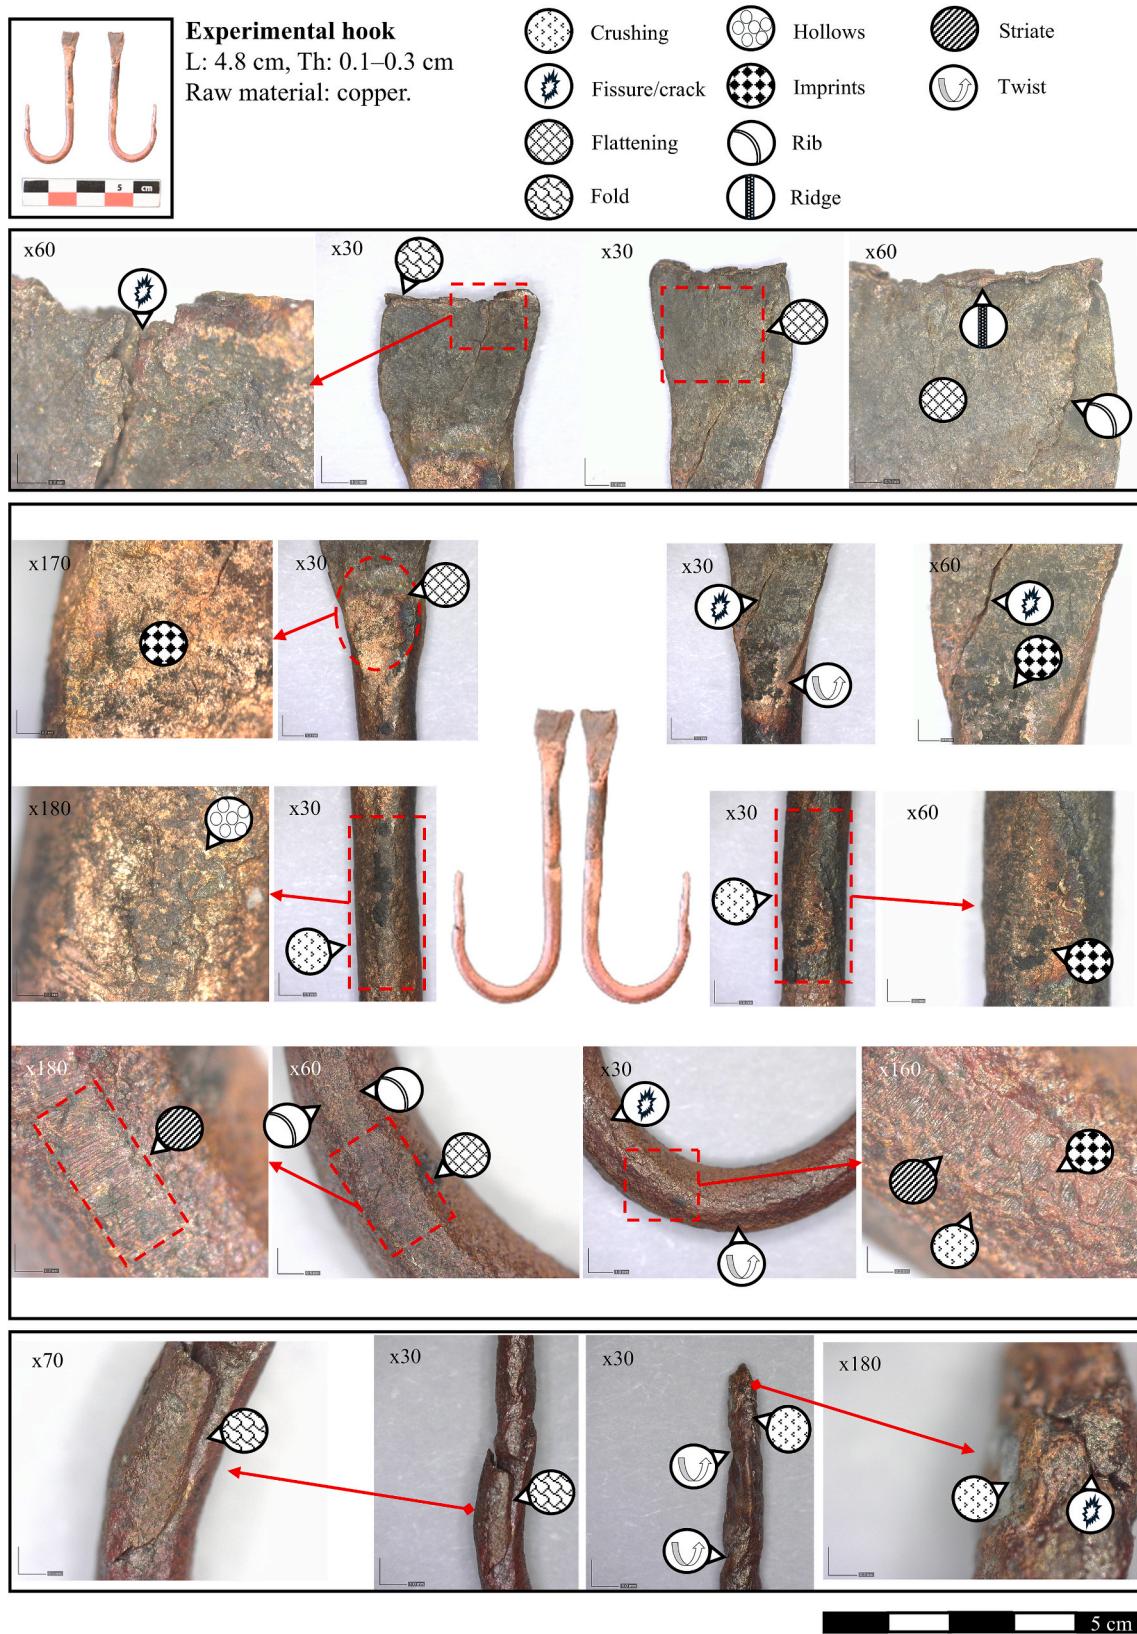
Manufacturing traces on a copper fish-hook replica. © V. Martin.
